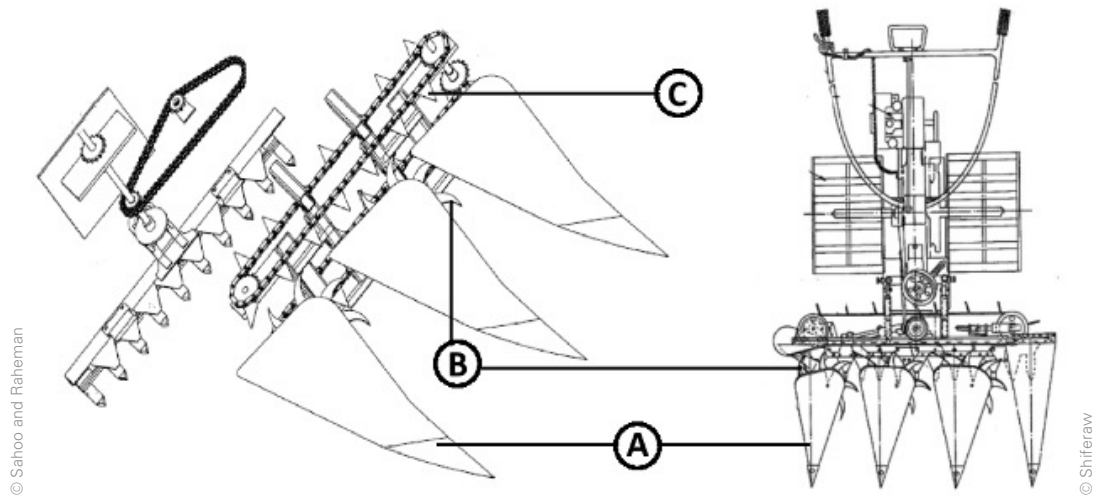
Diagram of a reaper machine (left) and mounted frontally on a two-wheeled tractor with steel cage wheel (right), with (A) crop dividers, (B) star-wheels that grasp the crops and guide them towards (C) the cutting blades on the lugged chain.
